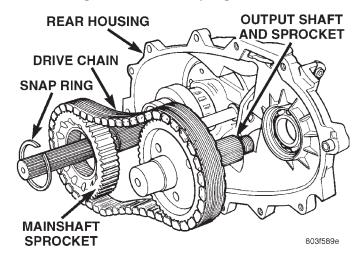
Front Output Shaft, Drive Gear And Chain Removal
